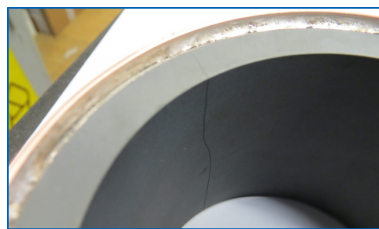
Second brazing applied to the ferrite cylinder of final dimensions. *Courtesy: F. Motschmann.
